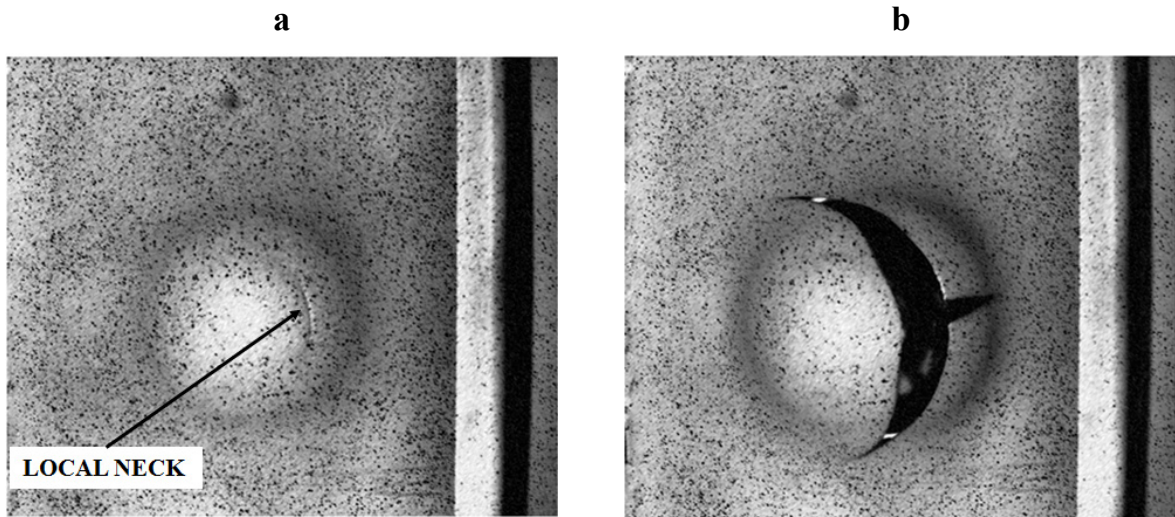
Pictures of test specimen: (a) and (b) shows the center region of test specimen QSB1 just prior and after fracture.
